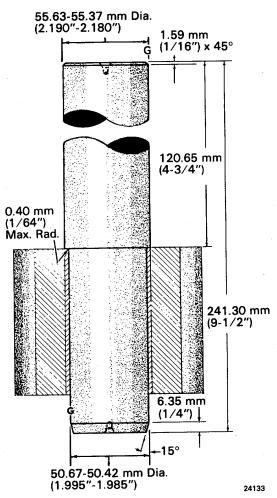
Oil Pump Driven Gear Bushing Tool
